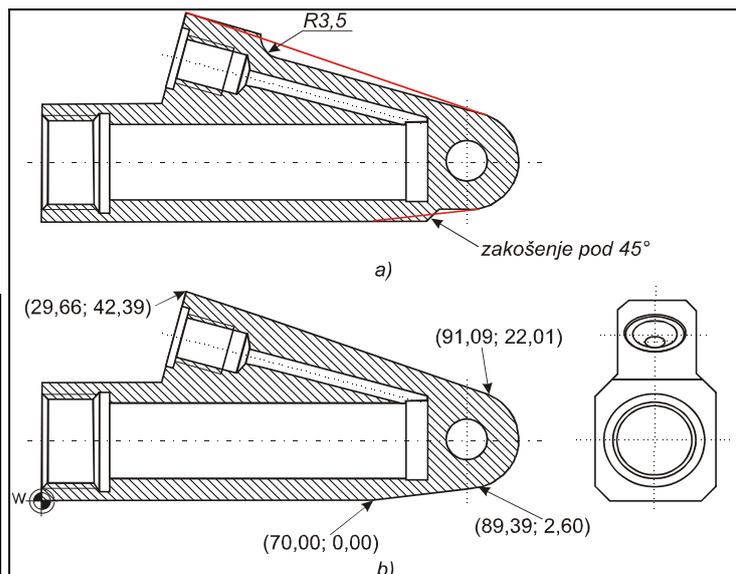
Improving of part 2 geometrical shape – - actuator's body: a) old shape, b) new part's shape
